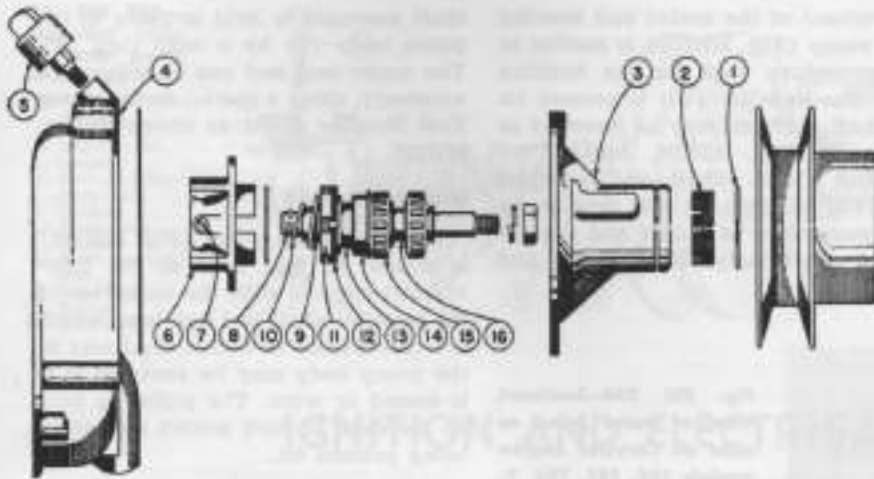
Taper roller bearing type pump used on Continental engines.
